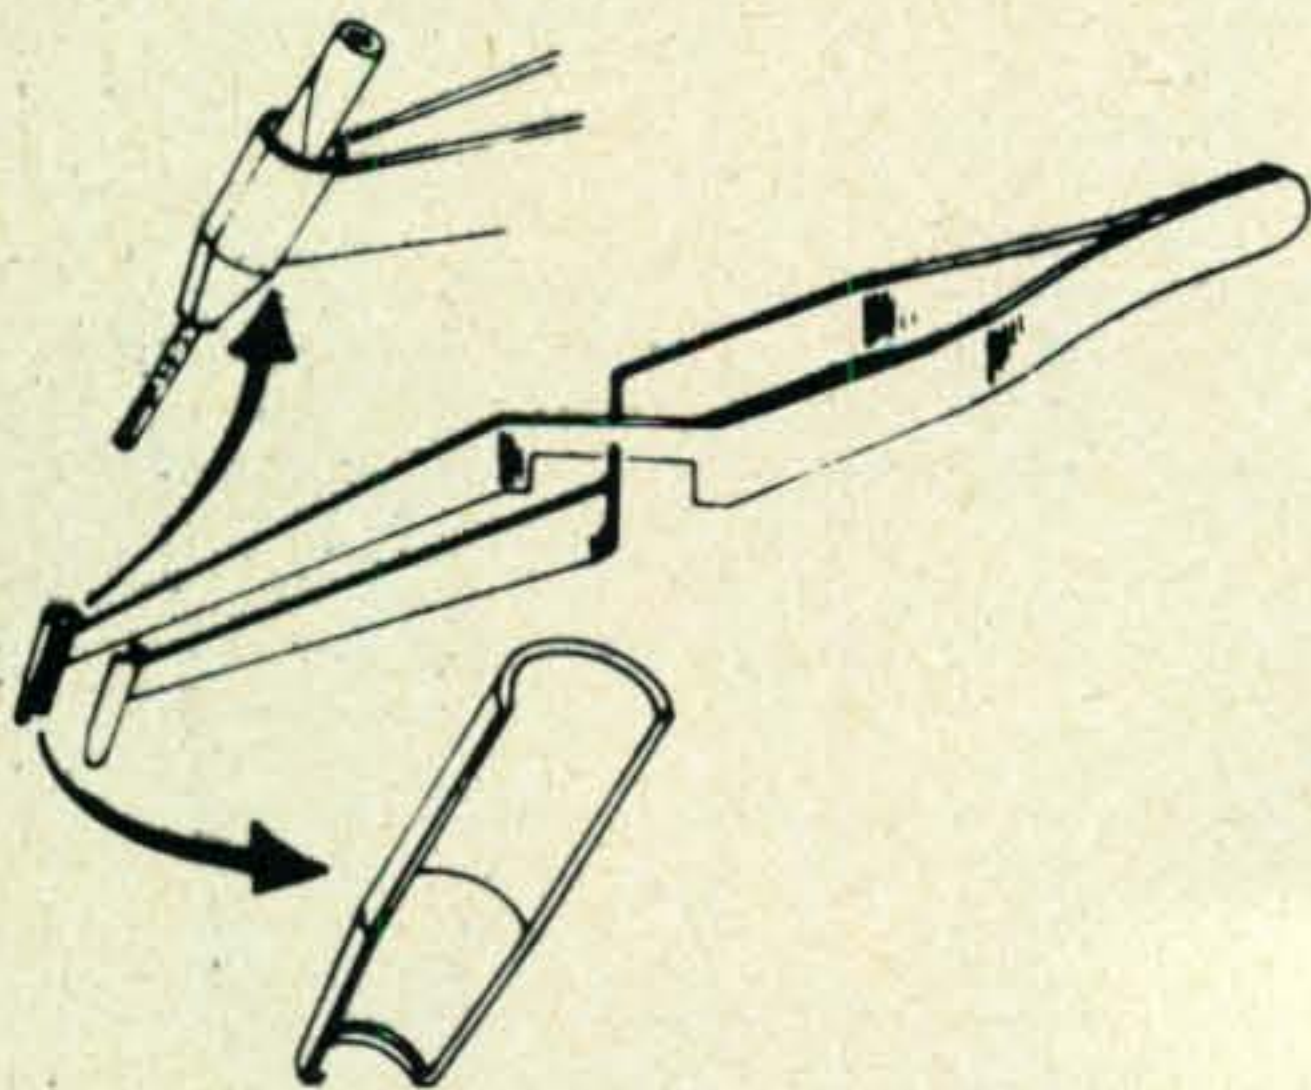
Construction and use of an antiwicking tool. This device prevents solder from flowing up the stranded wire under the insulation.
